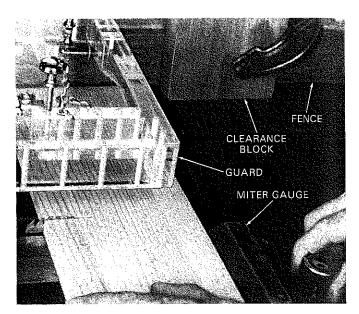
Crosscutting duplicate pieces using a circular saw and clearance block.
